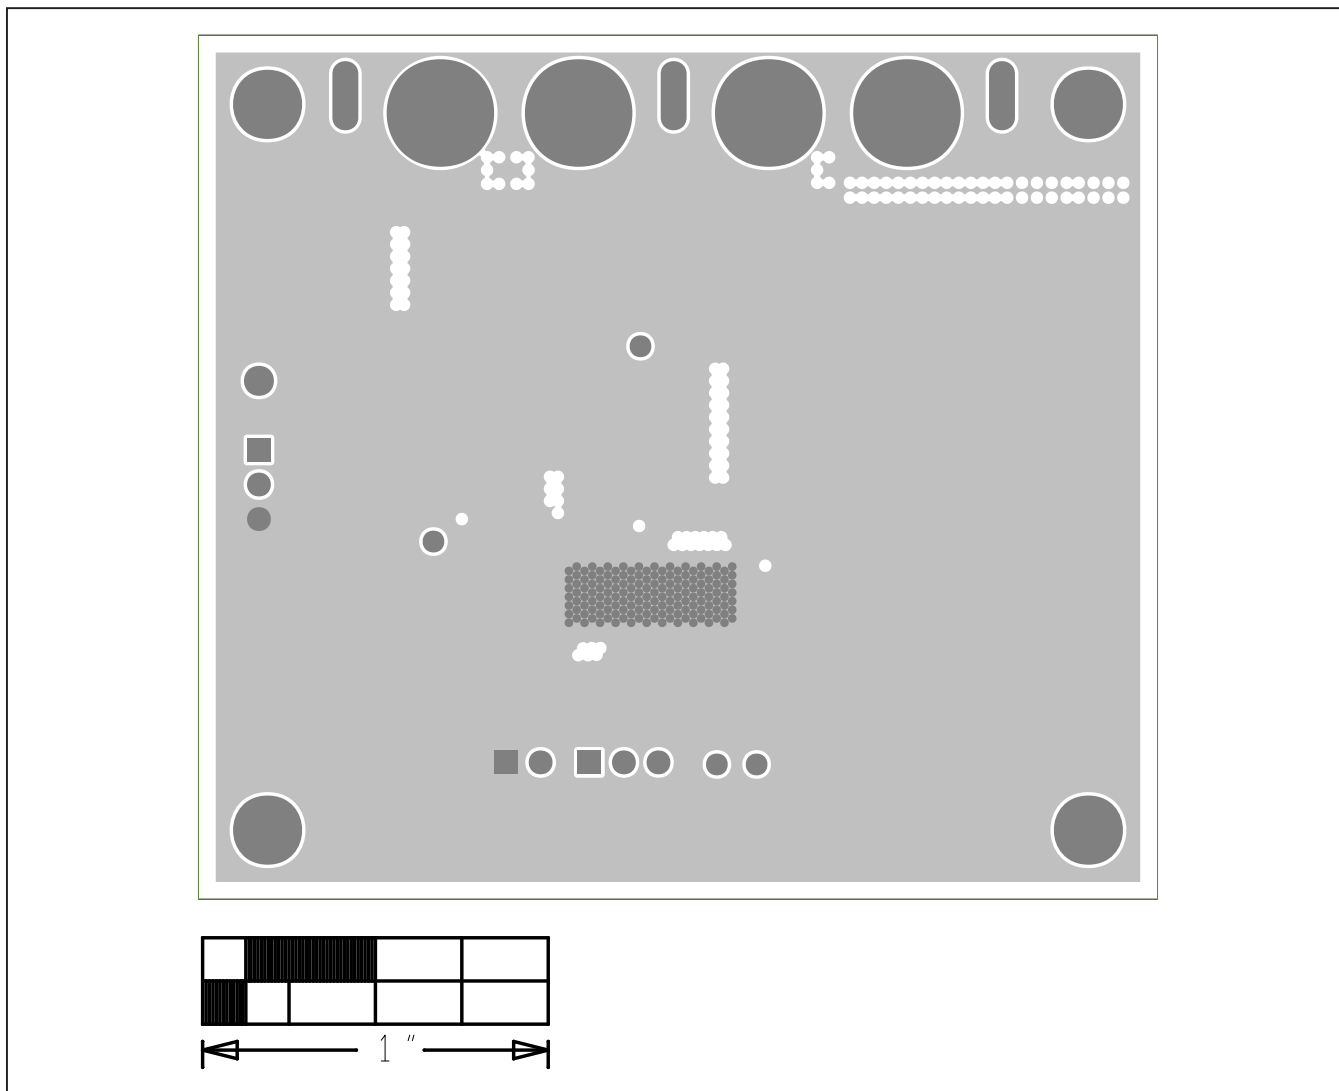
MAXM17546 5V Output EV kit PCB Layout—Layer 2
